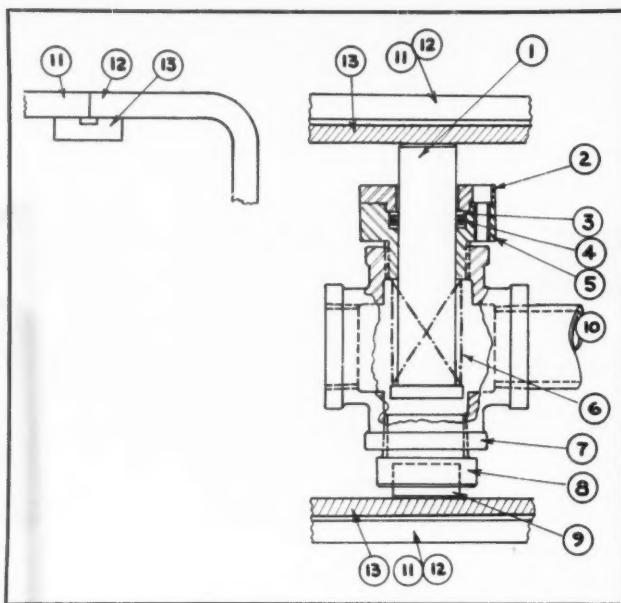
Sketch of air-operated back-up device used in arc welding joints of box section shown at the right in Fig. 1.
